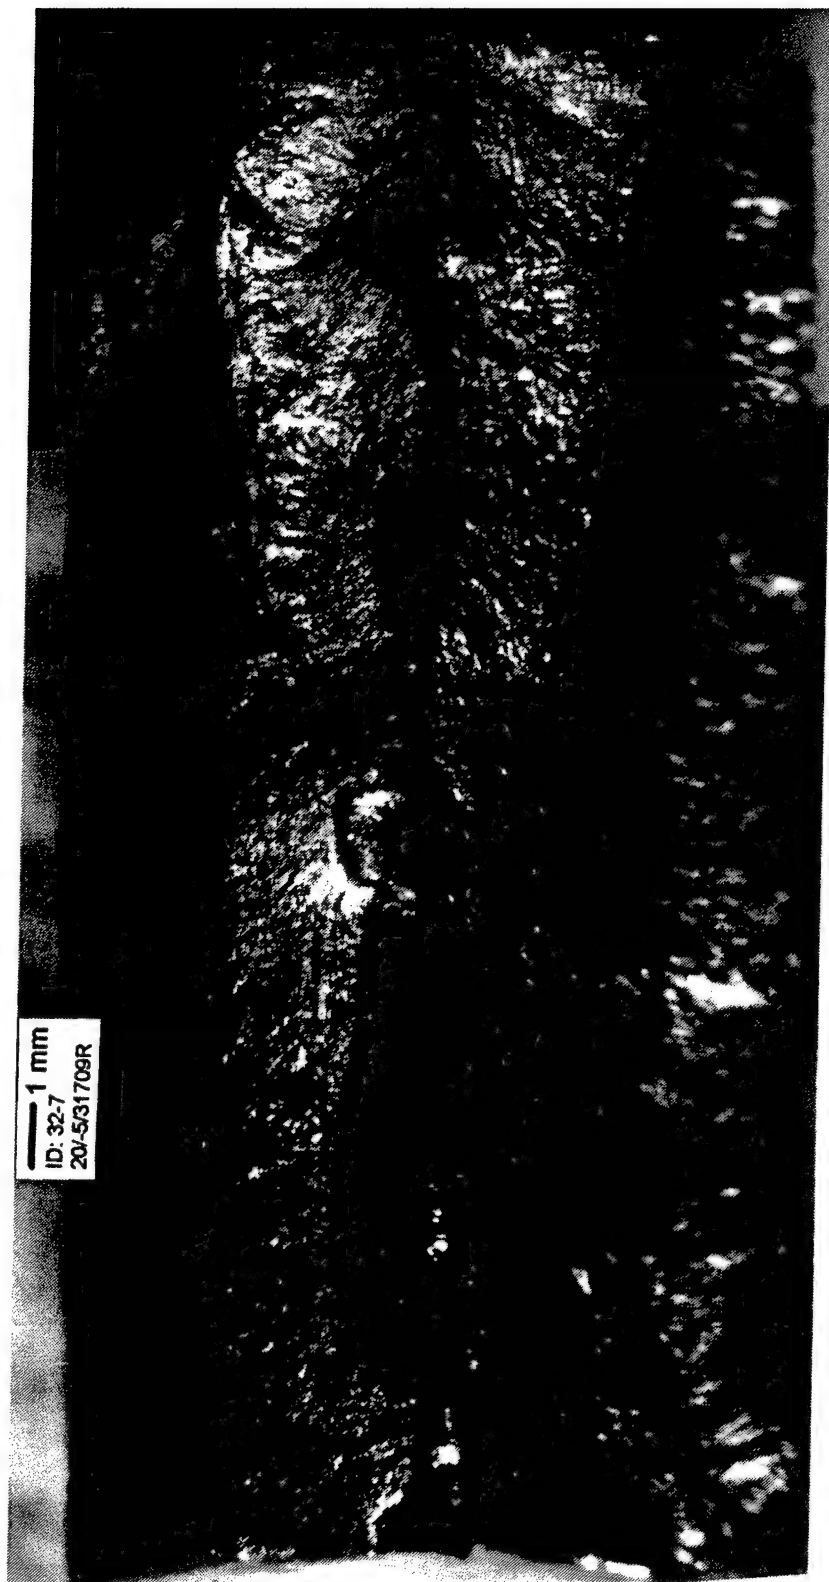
Fatigue fracture surface of the HSLA-80 but weld sample subjected to random loading:
